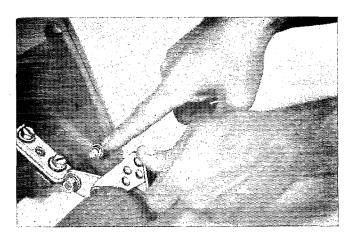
Be sure the wheel setting and the roller bracket setting are in the relative hole on both sides. Then retighten wheel nuts and set roller bracket in pins on side plate. (See Fig. 10). The cutting height can be determined in inches by measuring the distance between the ground and the cutting edge of the bed knife.
